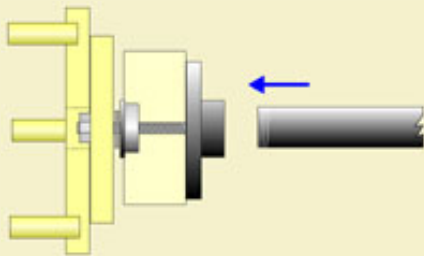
Threading the 3/4" black plumbing pipe into the flange mounted on the movable vice jaw.
